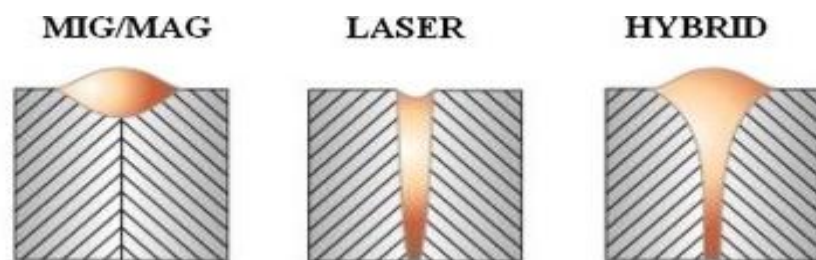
Schemes of formation of welds in arc welding, laser welding and hybrid laser-arc welding [5].
